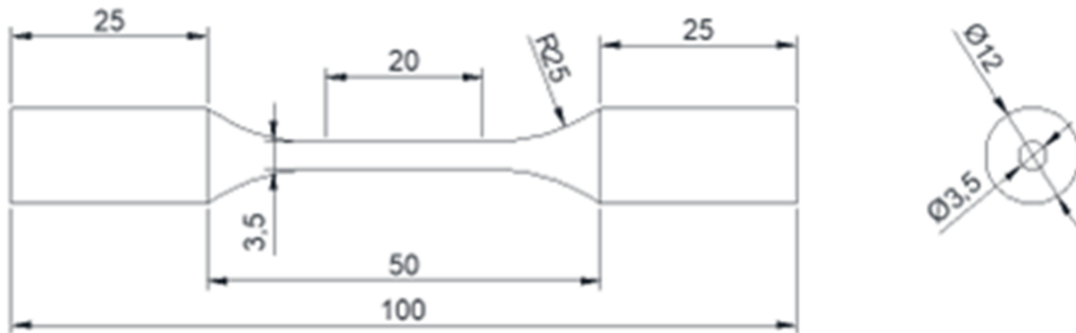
Fatigue test specimen (All dimensions are in mm).
